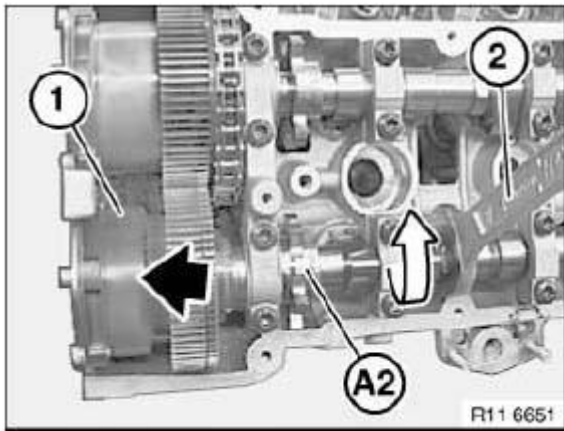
Rotating Exhaust Camshaft At Hexagon Head
